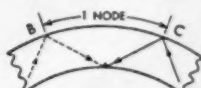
INSIDE-SURFACE DEFECT
